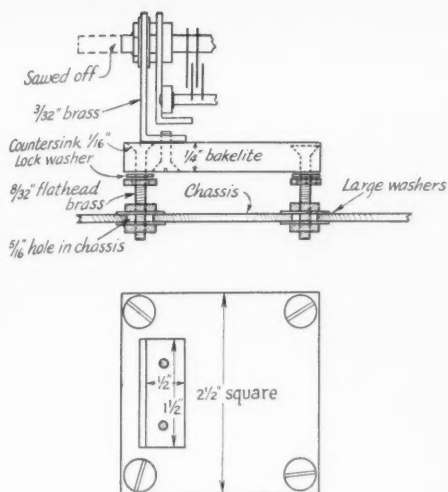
Adjustable condenser mounting for oscillator section of condenser gang. Only this mounting has four legs; the other two mountings have three legs each.
